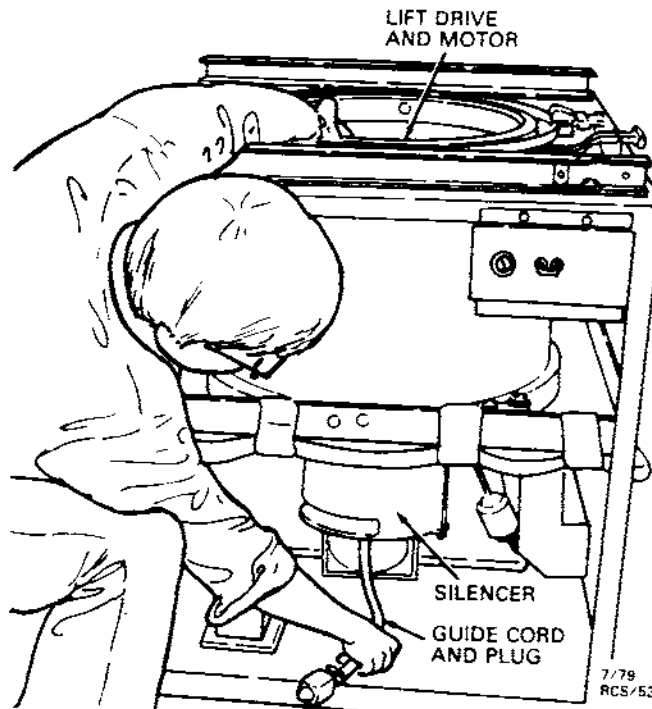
Drive Motor and Gyro-Action Drive Removal
